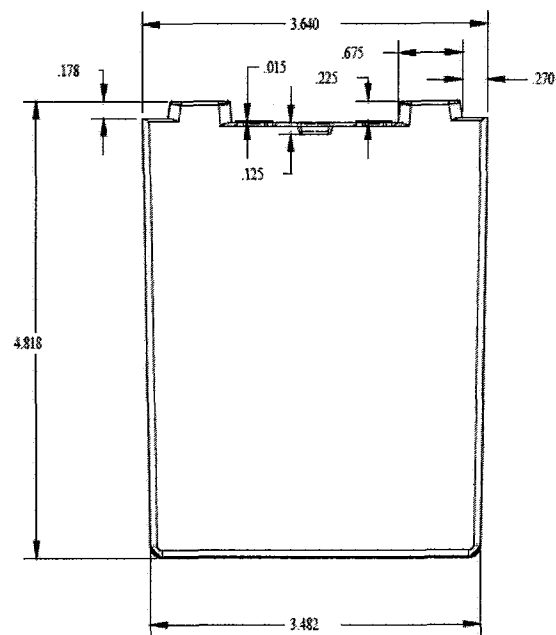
Side View Dimensions (inches) of LIB Cell Module
